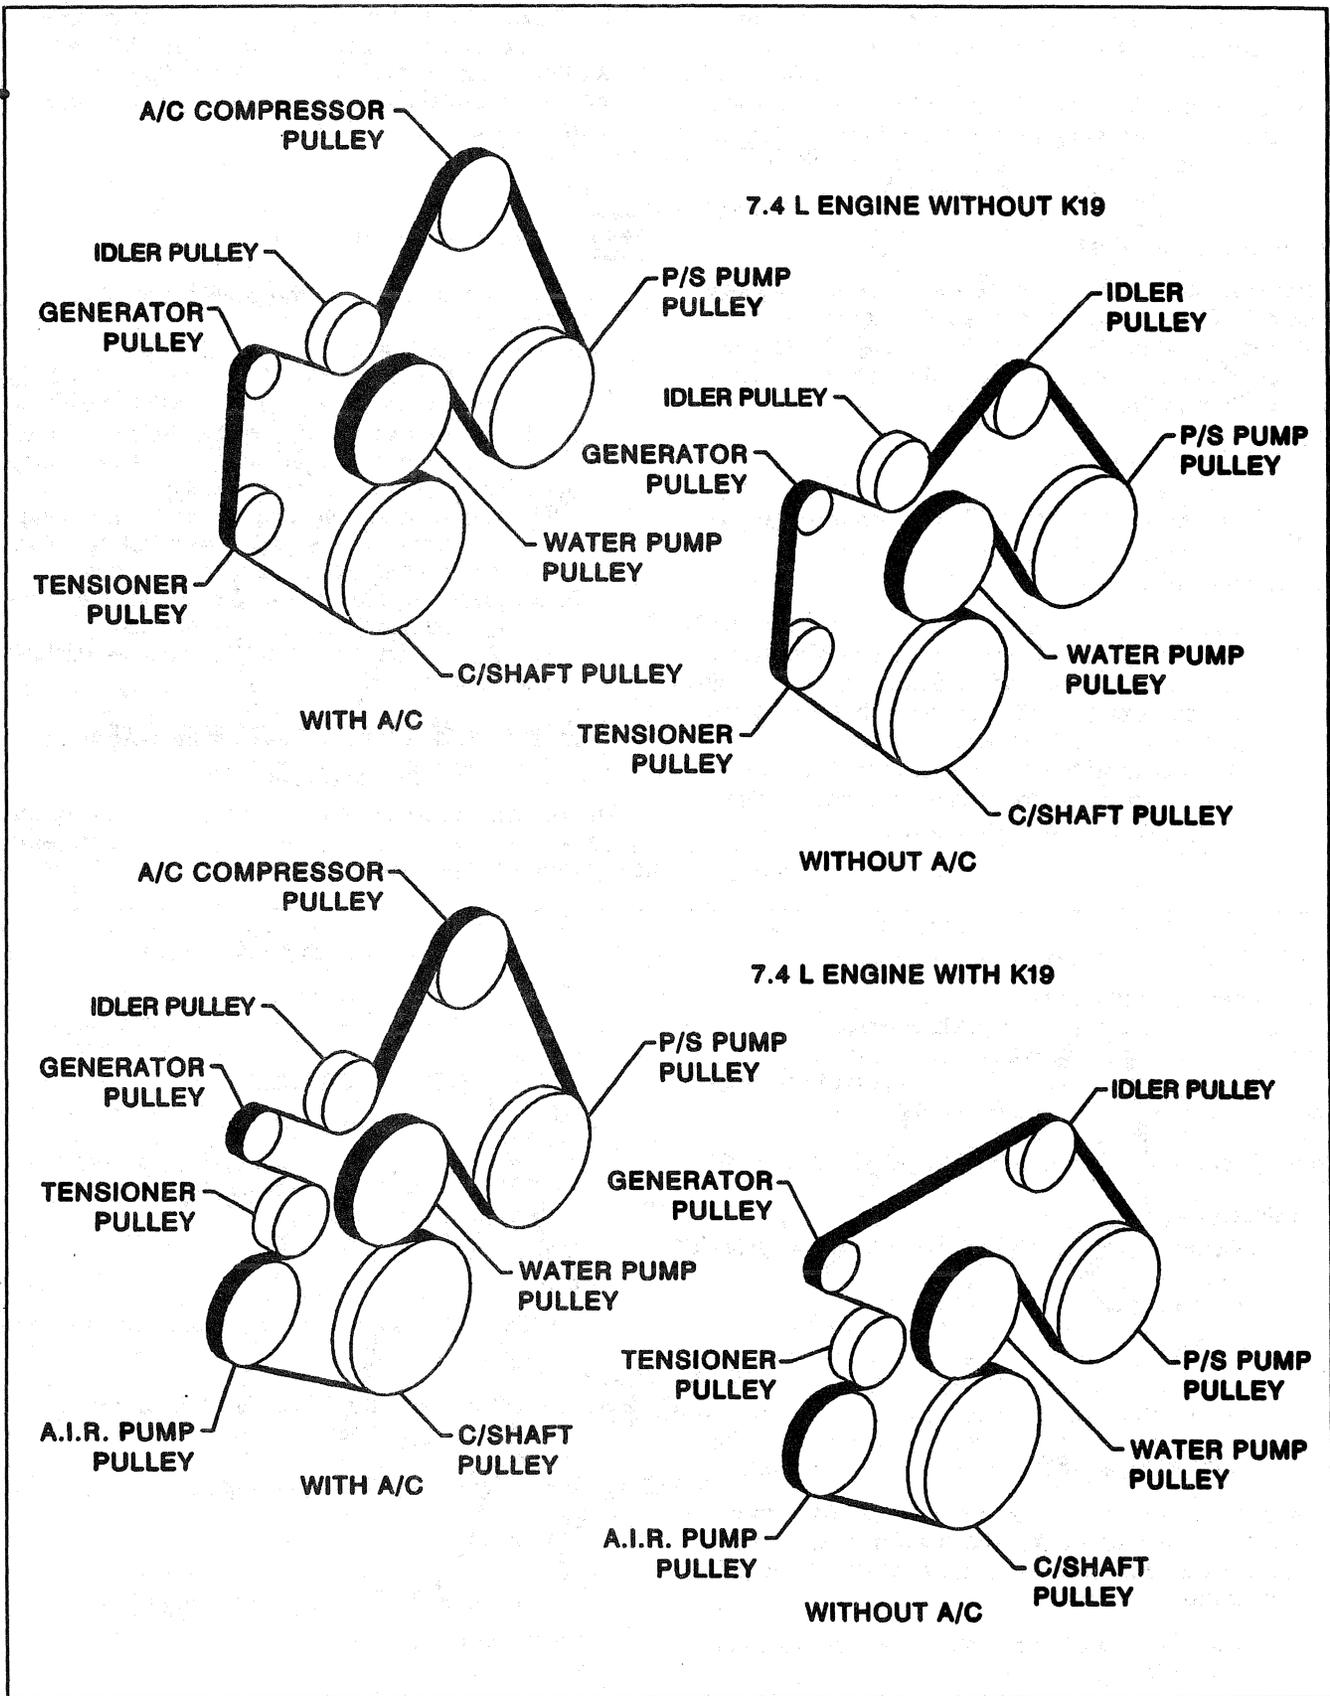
Multiple Rib Drive Belt Routing (7.4L Engines)
